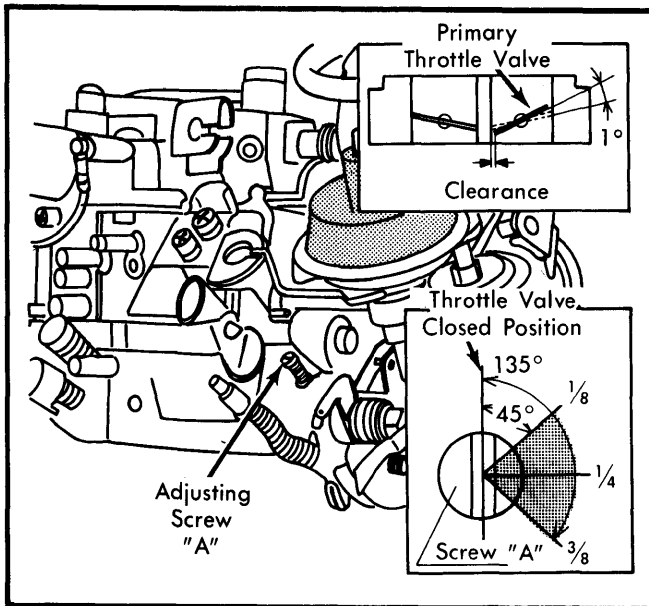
Adjusting Primary Throttle Valve Initial Opening Angle
